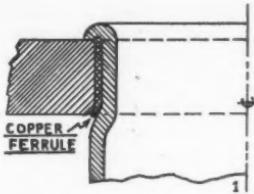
Drawing illustrating method commonly used in installing locomotive boiler flues in rear flue sheet.
